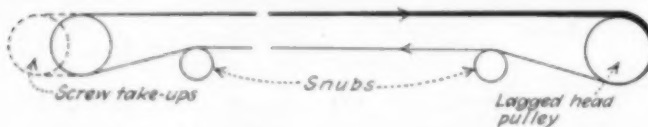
Class II Conveyor, Lagged Head Pulley, Screw Take-up
